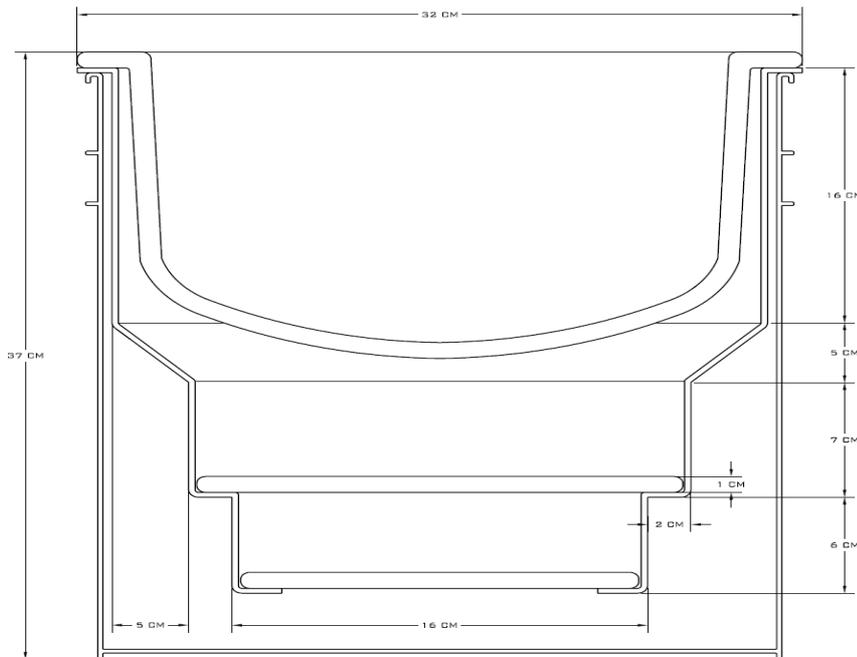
Dimensions and placement of disks in Design 3.
